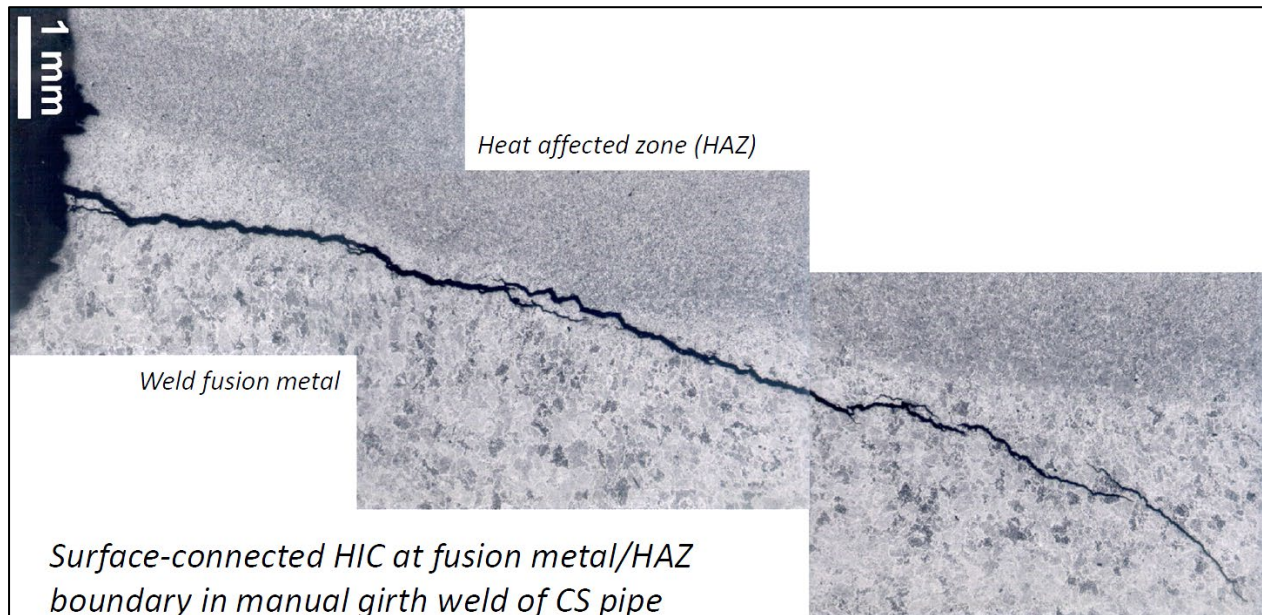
Example of HIC in Weld HAZ [39]
